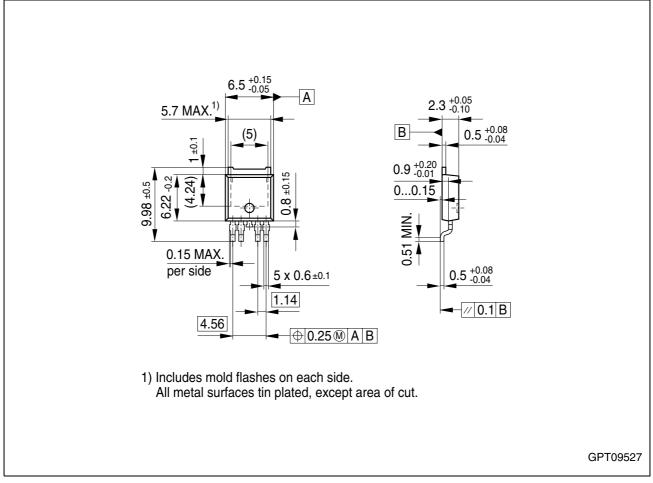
PG-TO252-5-11 (Plastic Transistor Single Outline)
